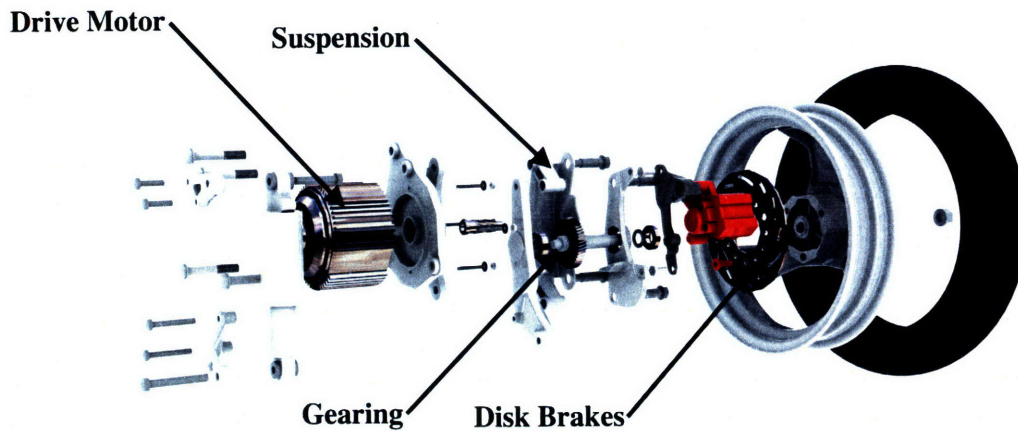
This exploded diagram of the current design for the Roboscooter's wheel-robot shows the components that go into the wheel hub.
